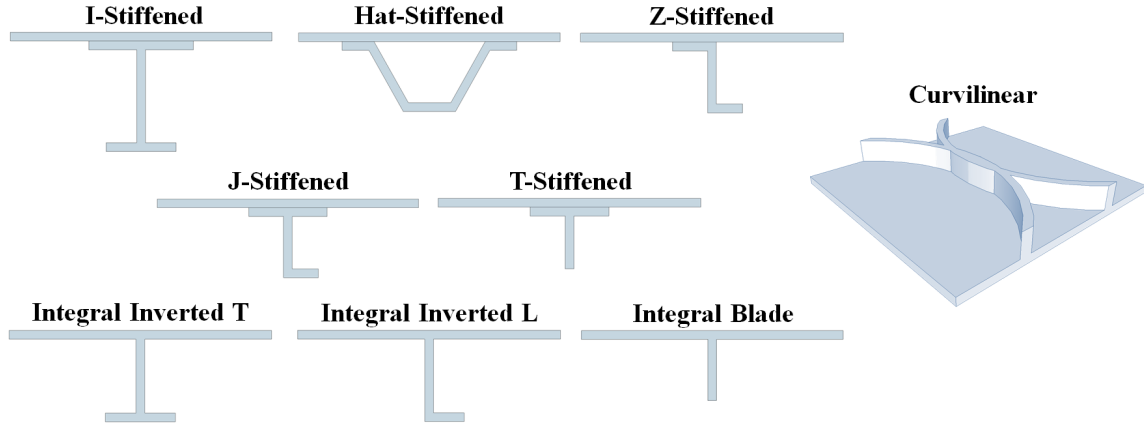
List of Panel Concepts Used in Aerospace Design Applications
